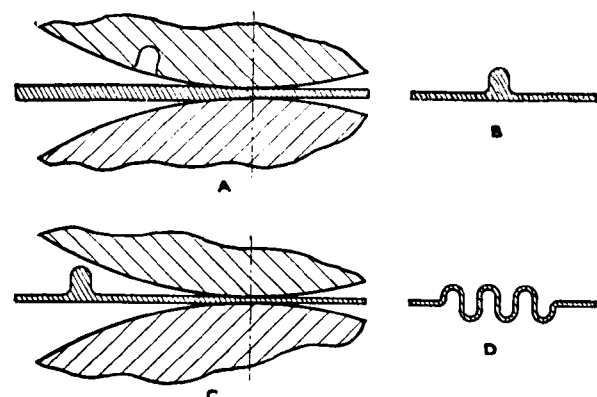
Schematic representation shows how a defect in a roll affects foil rolling. The defect in the roll, "A", produces a bump on the foil, "B". When this is rolled out "C", the amount of reduction is greater than for the surrounding metal and a wrinkle is produced, "D". Very often the wrinkle is perforated.
